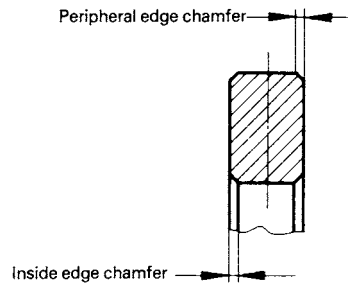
SECTION OF STRAIGHT-FACED RECTANGULAR RING
